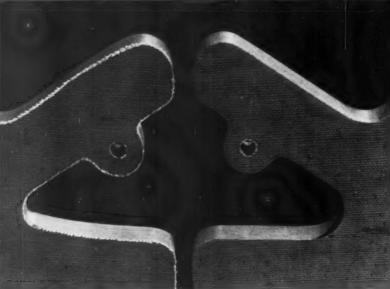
Close-up view of the parts in Fig. 6, showing the ragged edges obtained with conventional routing and the clean edges that are achieved with sub-zero machining.
